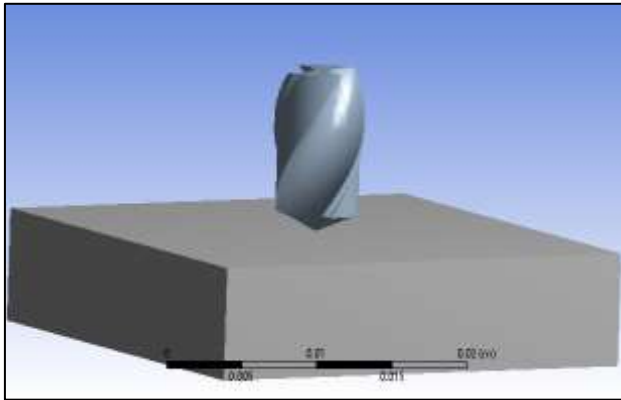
After modelling in CATIA software existing assembly of Drilling Cutter with work piece
